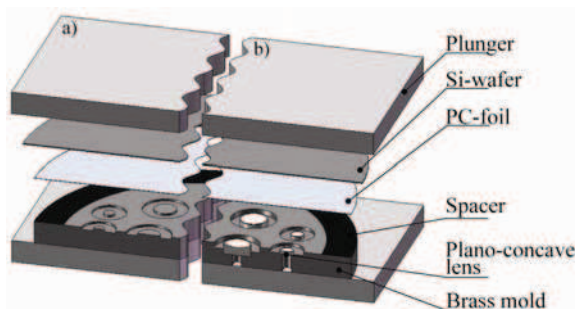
Fabrication process in a hot embossing machine for a lens chamber with a) a planar and b) a shaped membrane.
